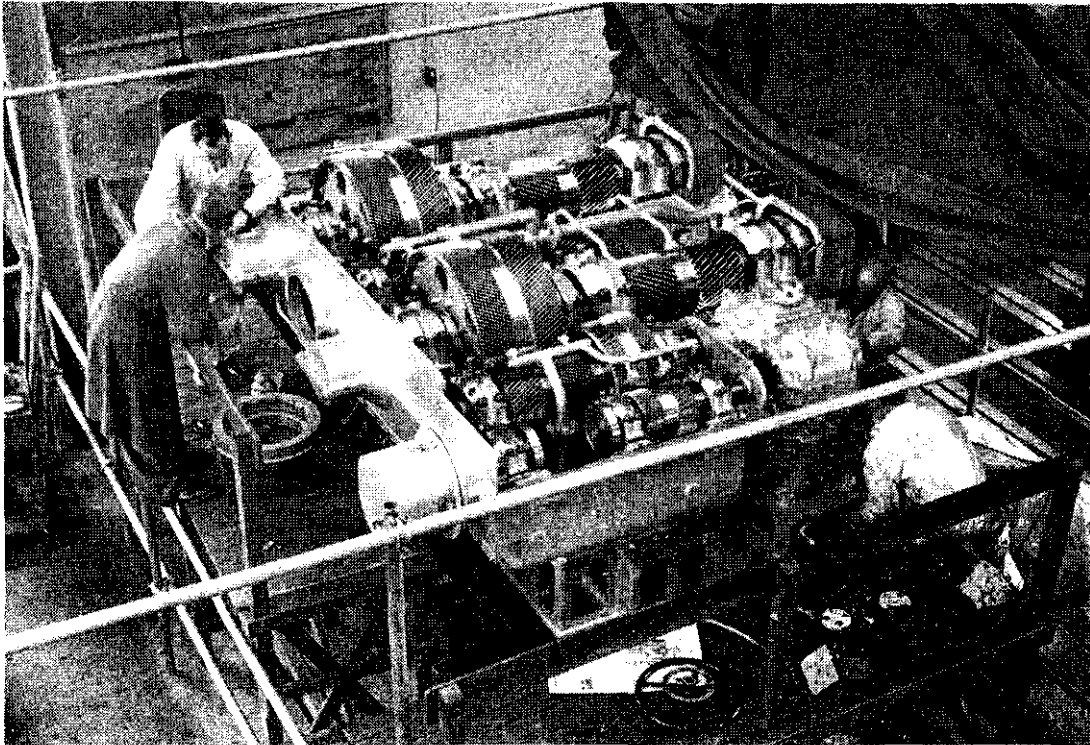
MANUFACTURE AND ASSEMBLY OF TYPE 12 FRIGATE GEARING AT BENDIGO ORDNANCE FACTORY
